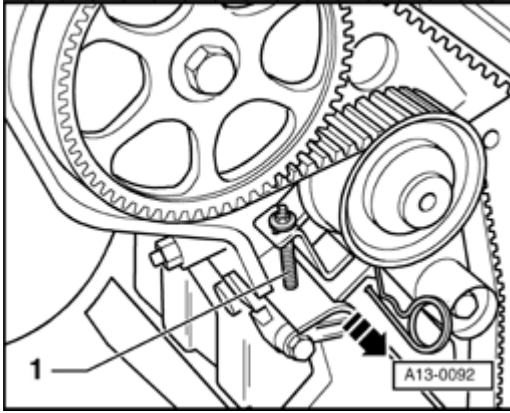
Pulling Out Locking Pin, Loosening Piston Of Toothed Belt Tensioning Element & Removing Stud
